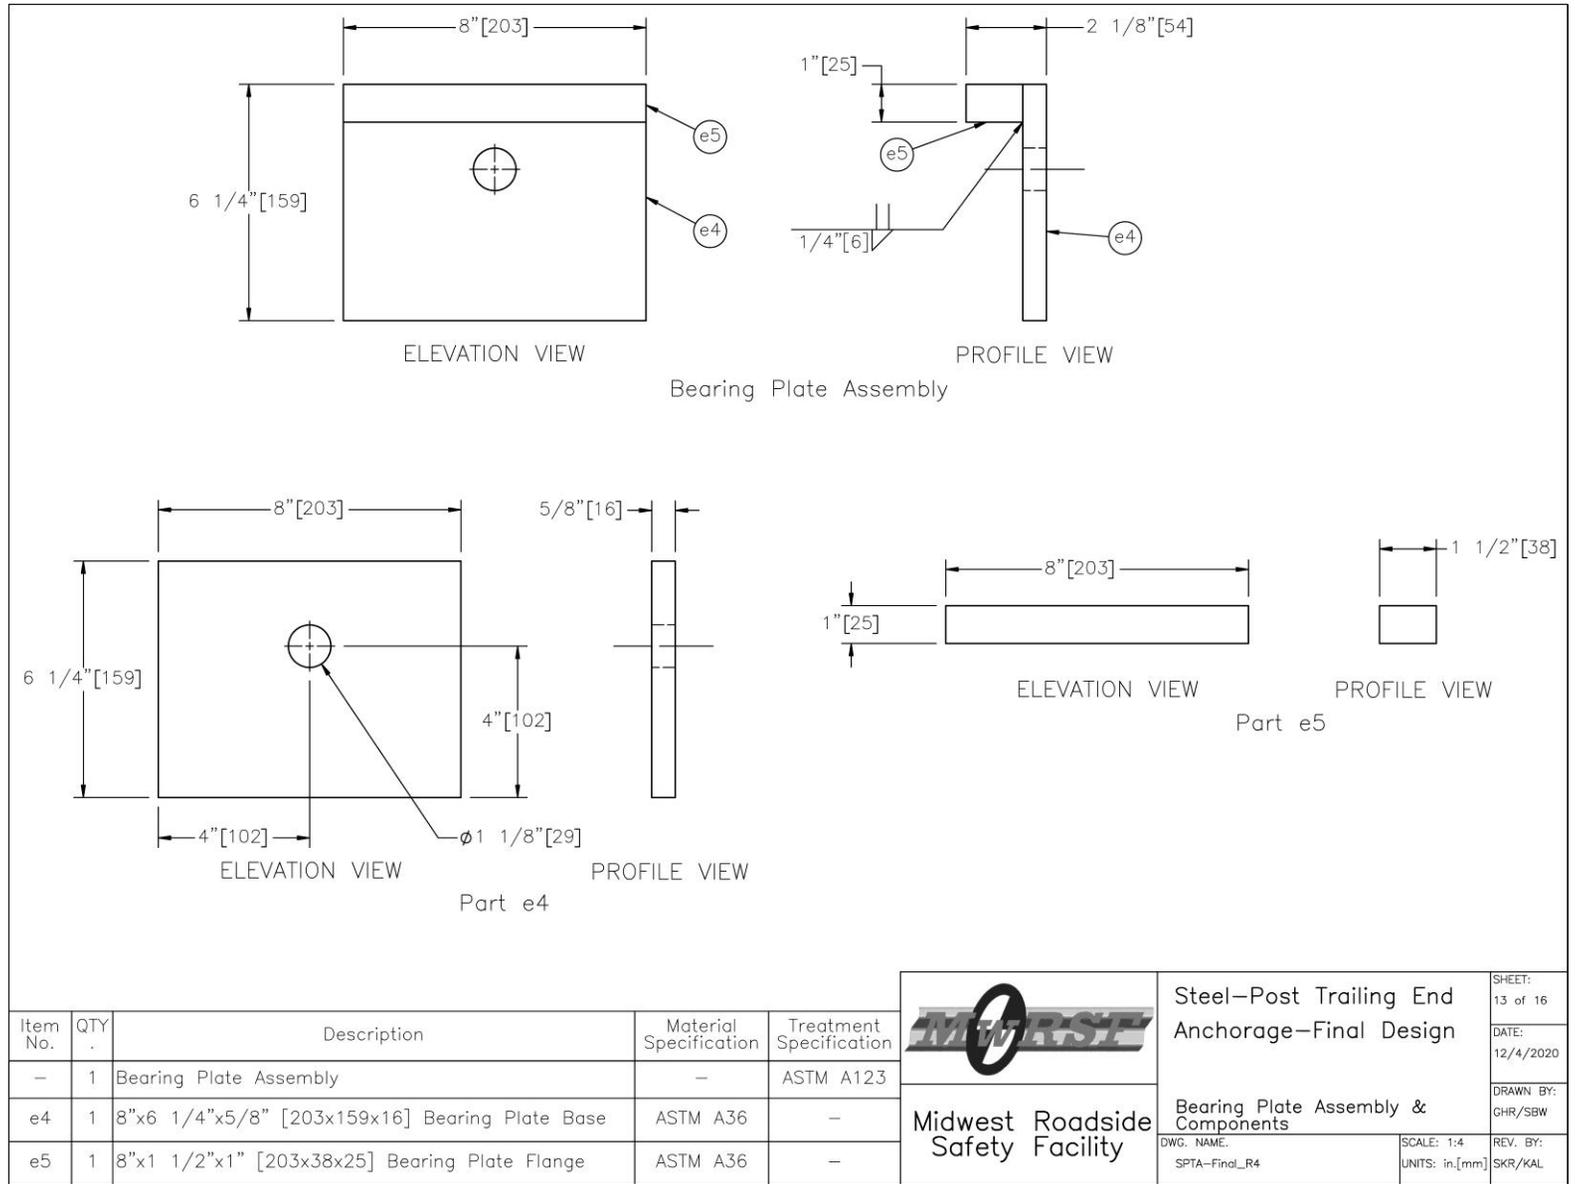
Steel-Post Trailing End Anchorage, Bearing Plate Assembly and Components
